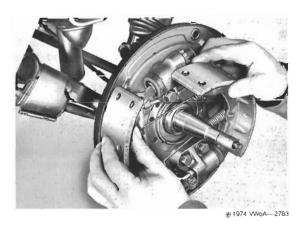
Front brake shoes being installed. Note that the rear shoe has been inserted into the lowe wheel cylinder piston.
